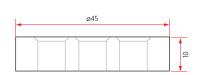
DETAILS Material: Zinc Fixings: 1x 10g 30mm CSK timber screw SSS
